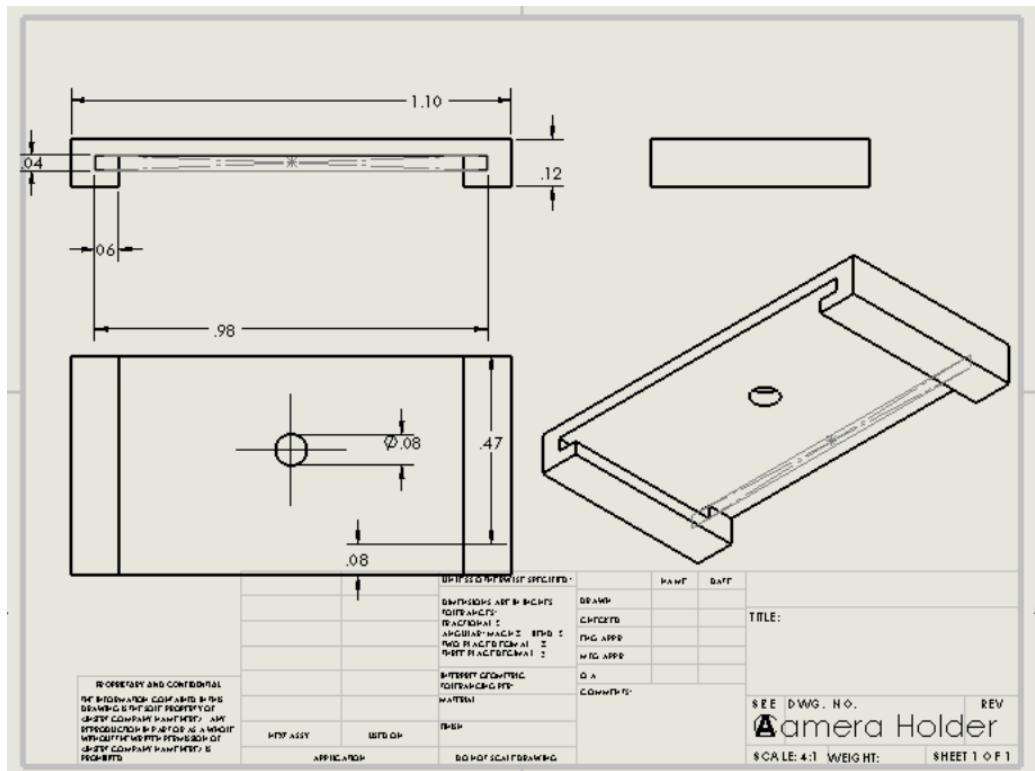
Engineering Drawing of Camera Holder (in.)
